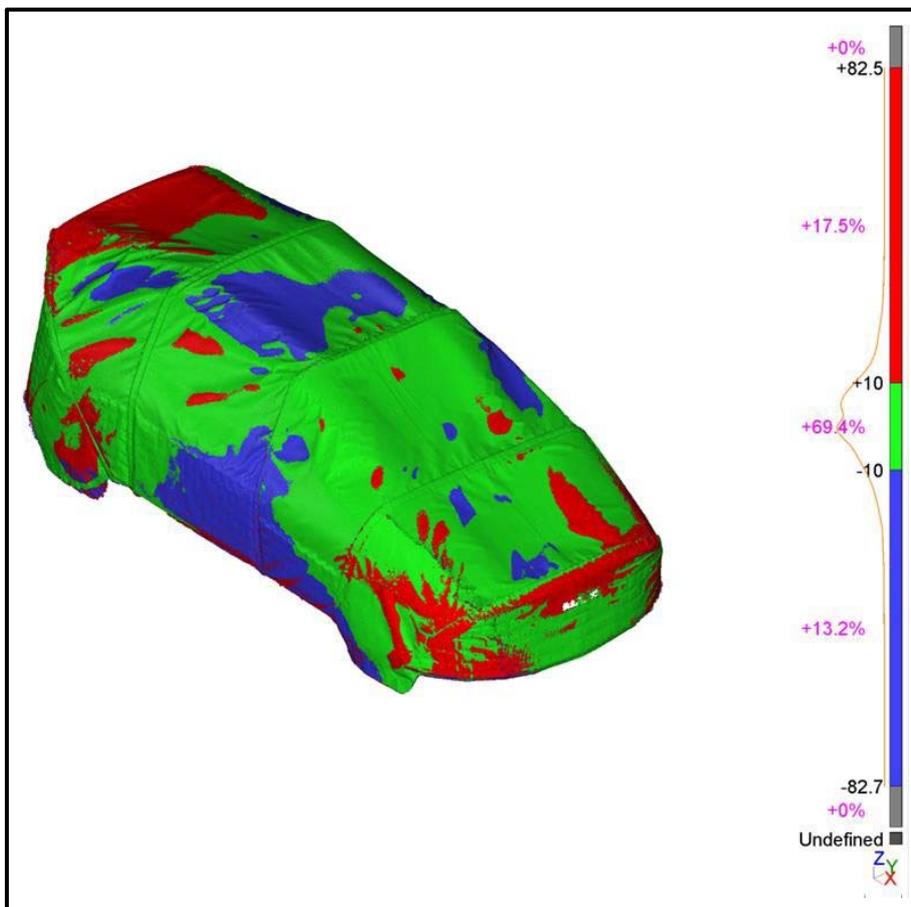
Comparison between first and third assembly for old used DRI VT (scale in mm)
